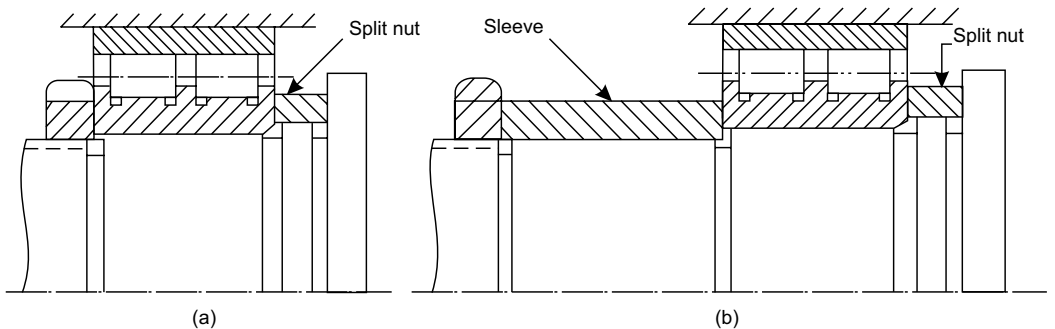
Methods of preloading cylindrical, double roller bearings
